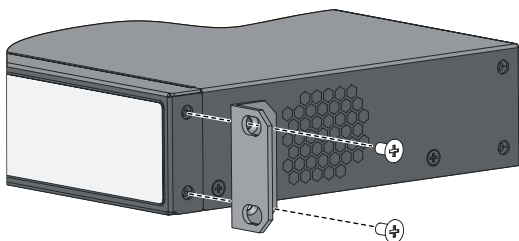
Install a two-holed mounting bracket on the chassis (rear mounting)
